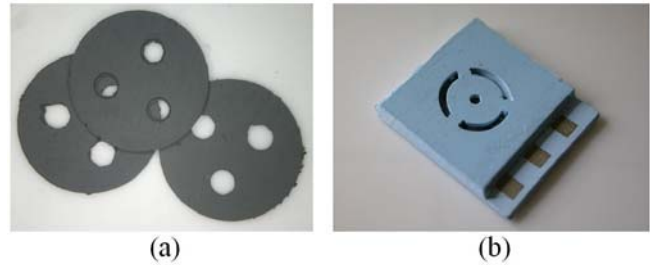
(a) Machined carbon sacrificial tape layers, and (b) final assembled device prior to sintering.
